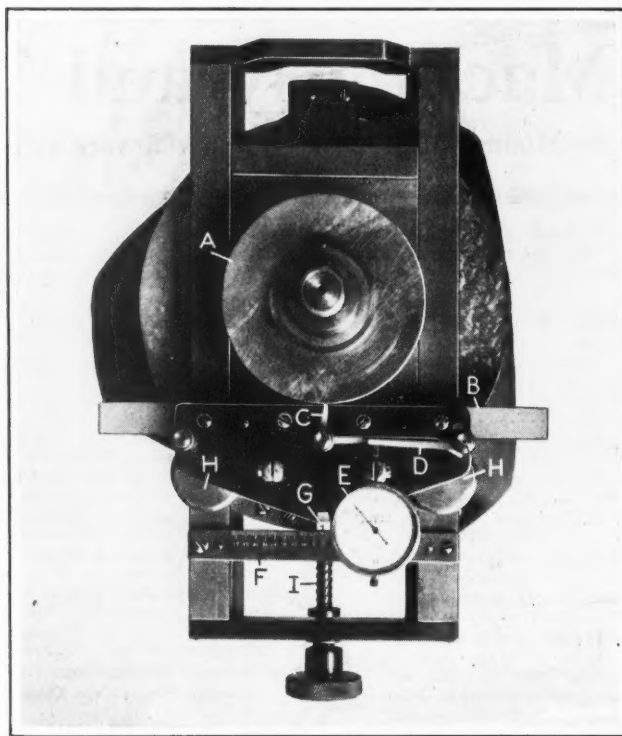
Gear-tooth Testing Machine with Work removed to show Disk of Base-circle Diameter
